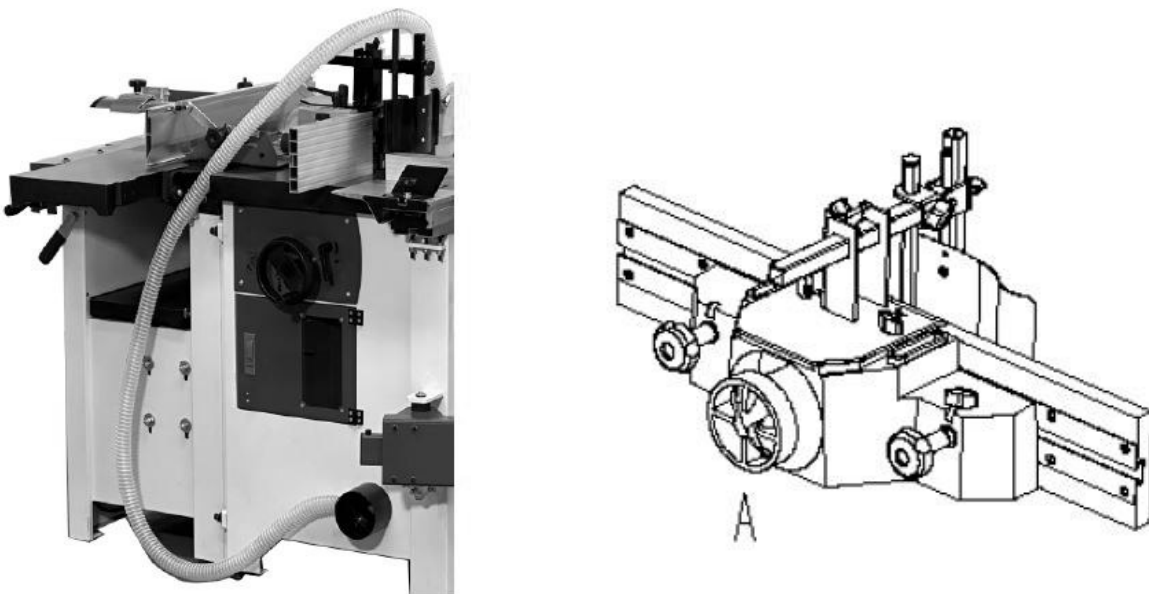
Extraction saw (left) and extraction milling machine (right)
